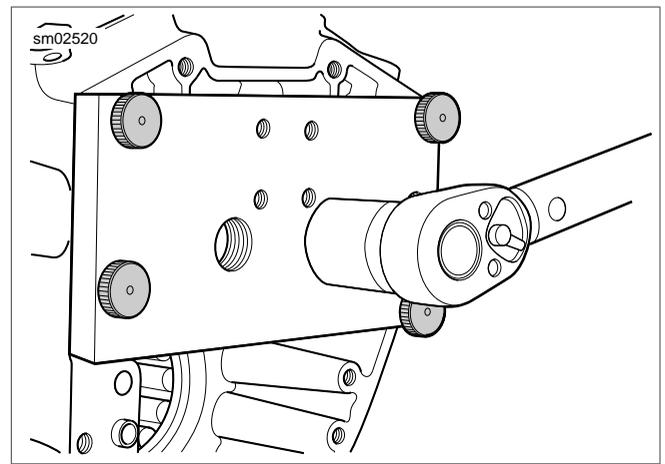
1 Inch (25.4 mm) Bearing Installation
